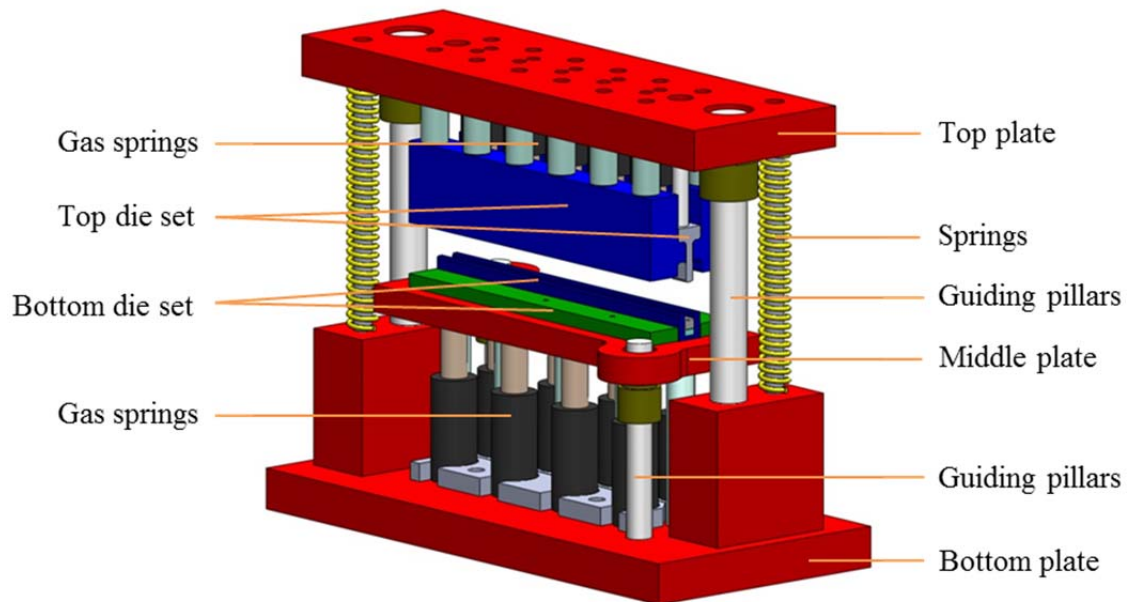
Isometric view of the hot stamping and cold die quenching tool set
